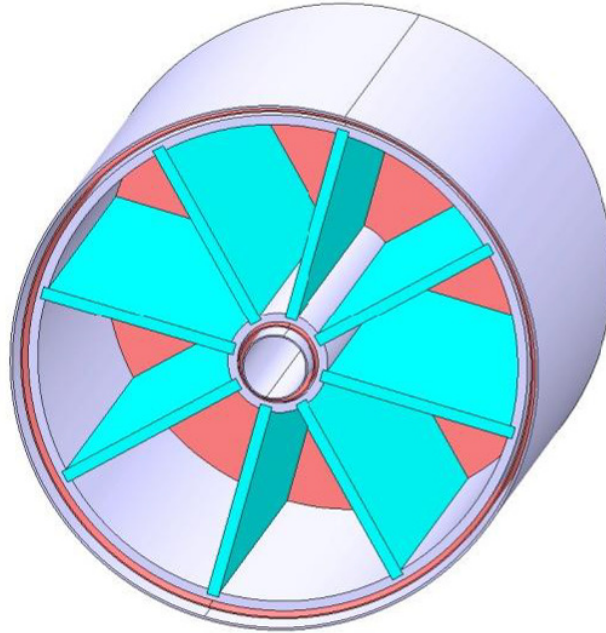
CAD drawing for a 2T air core toroid with 20 cm bore and a size about 1 m<sup>3</sup>
